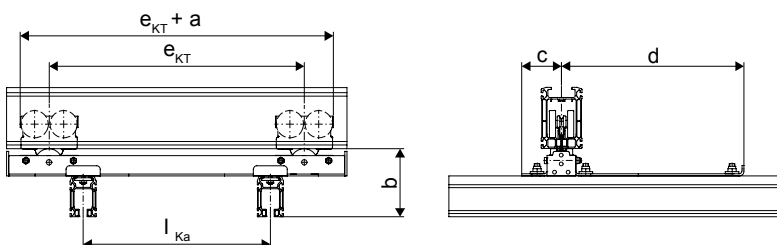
A12/A16 double girder crane end carriage, A18/A22/A28 track section
